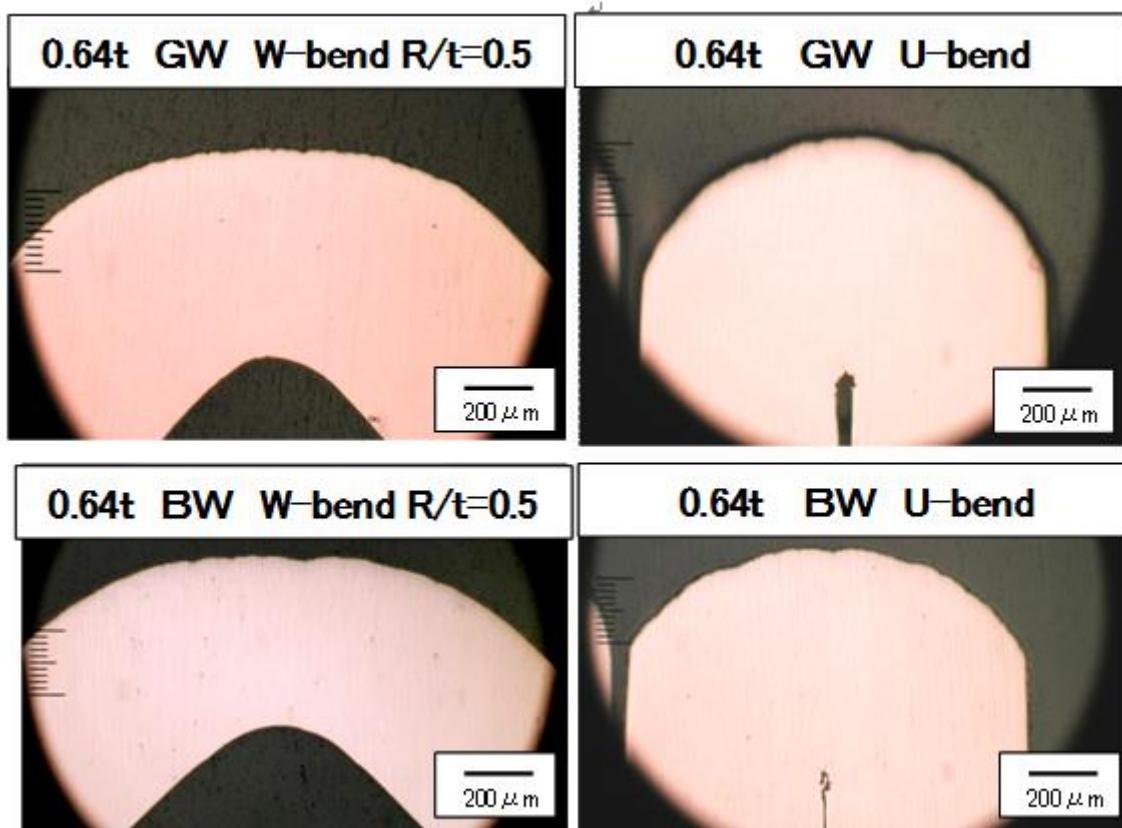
Cross Sections of Bend Test specimens (NKE012-H).
